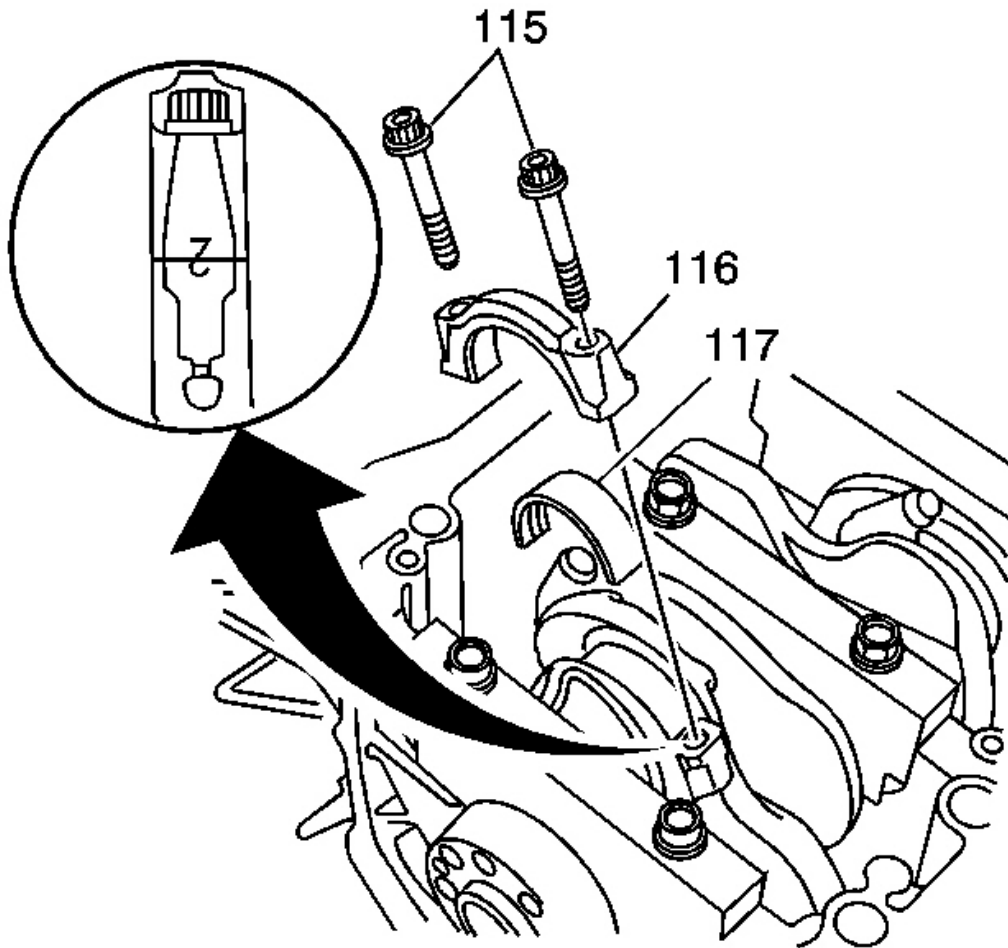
View Of Lower Bearing Half, Cap & Bolts
